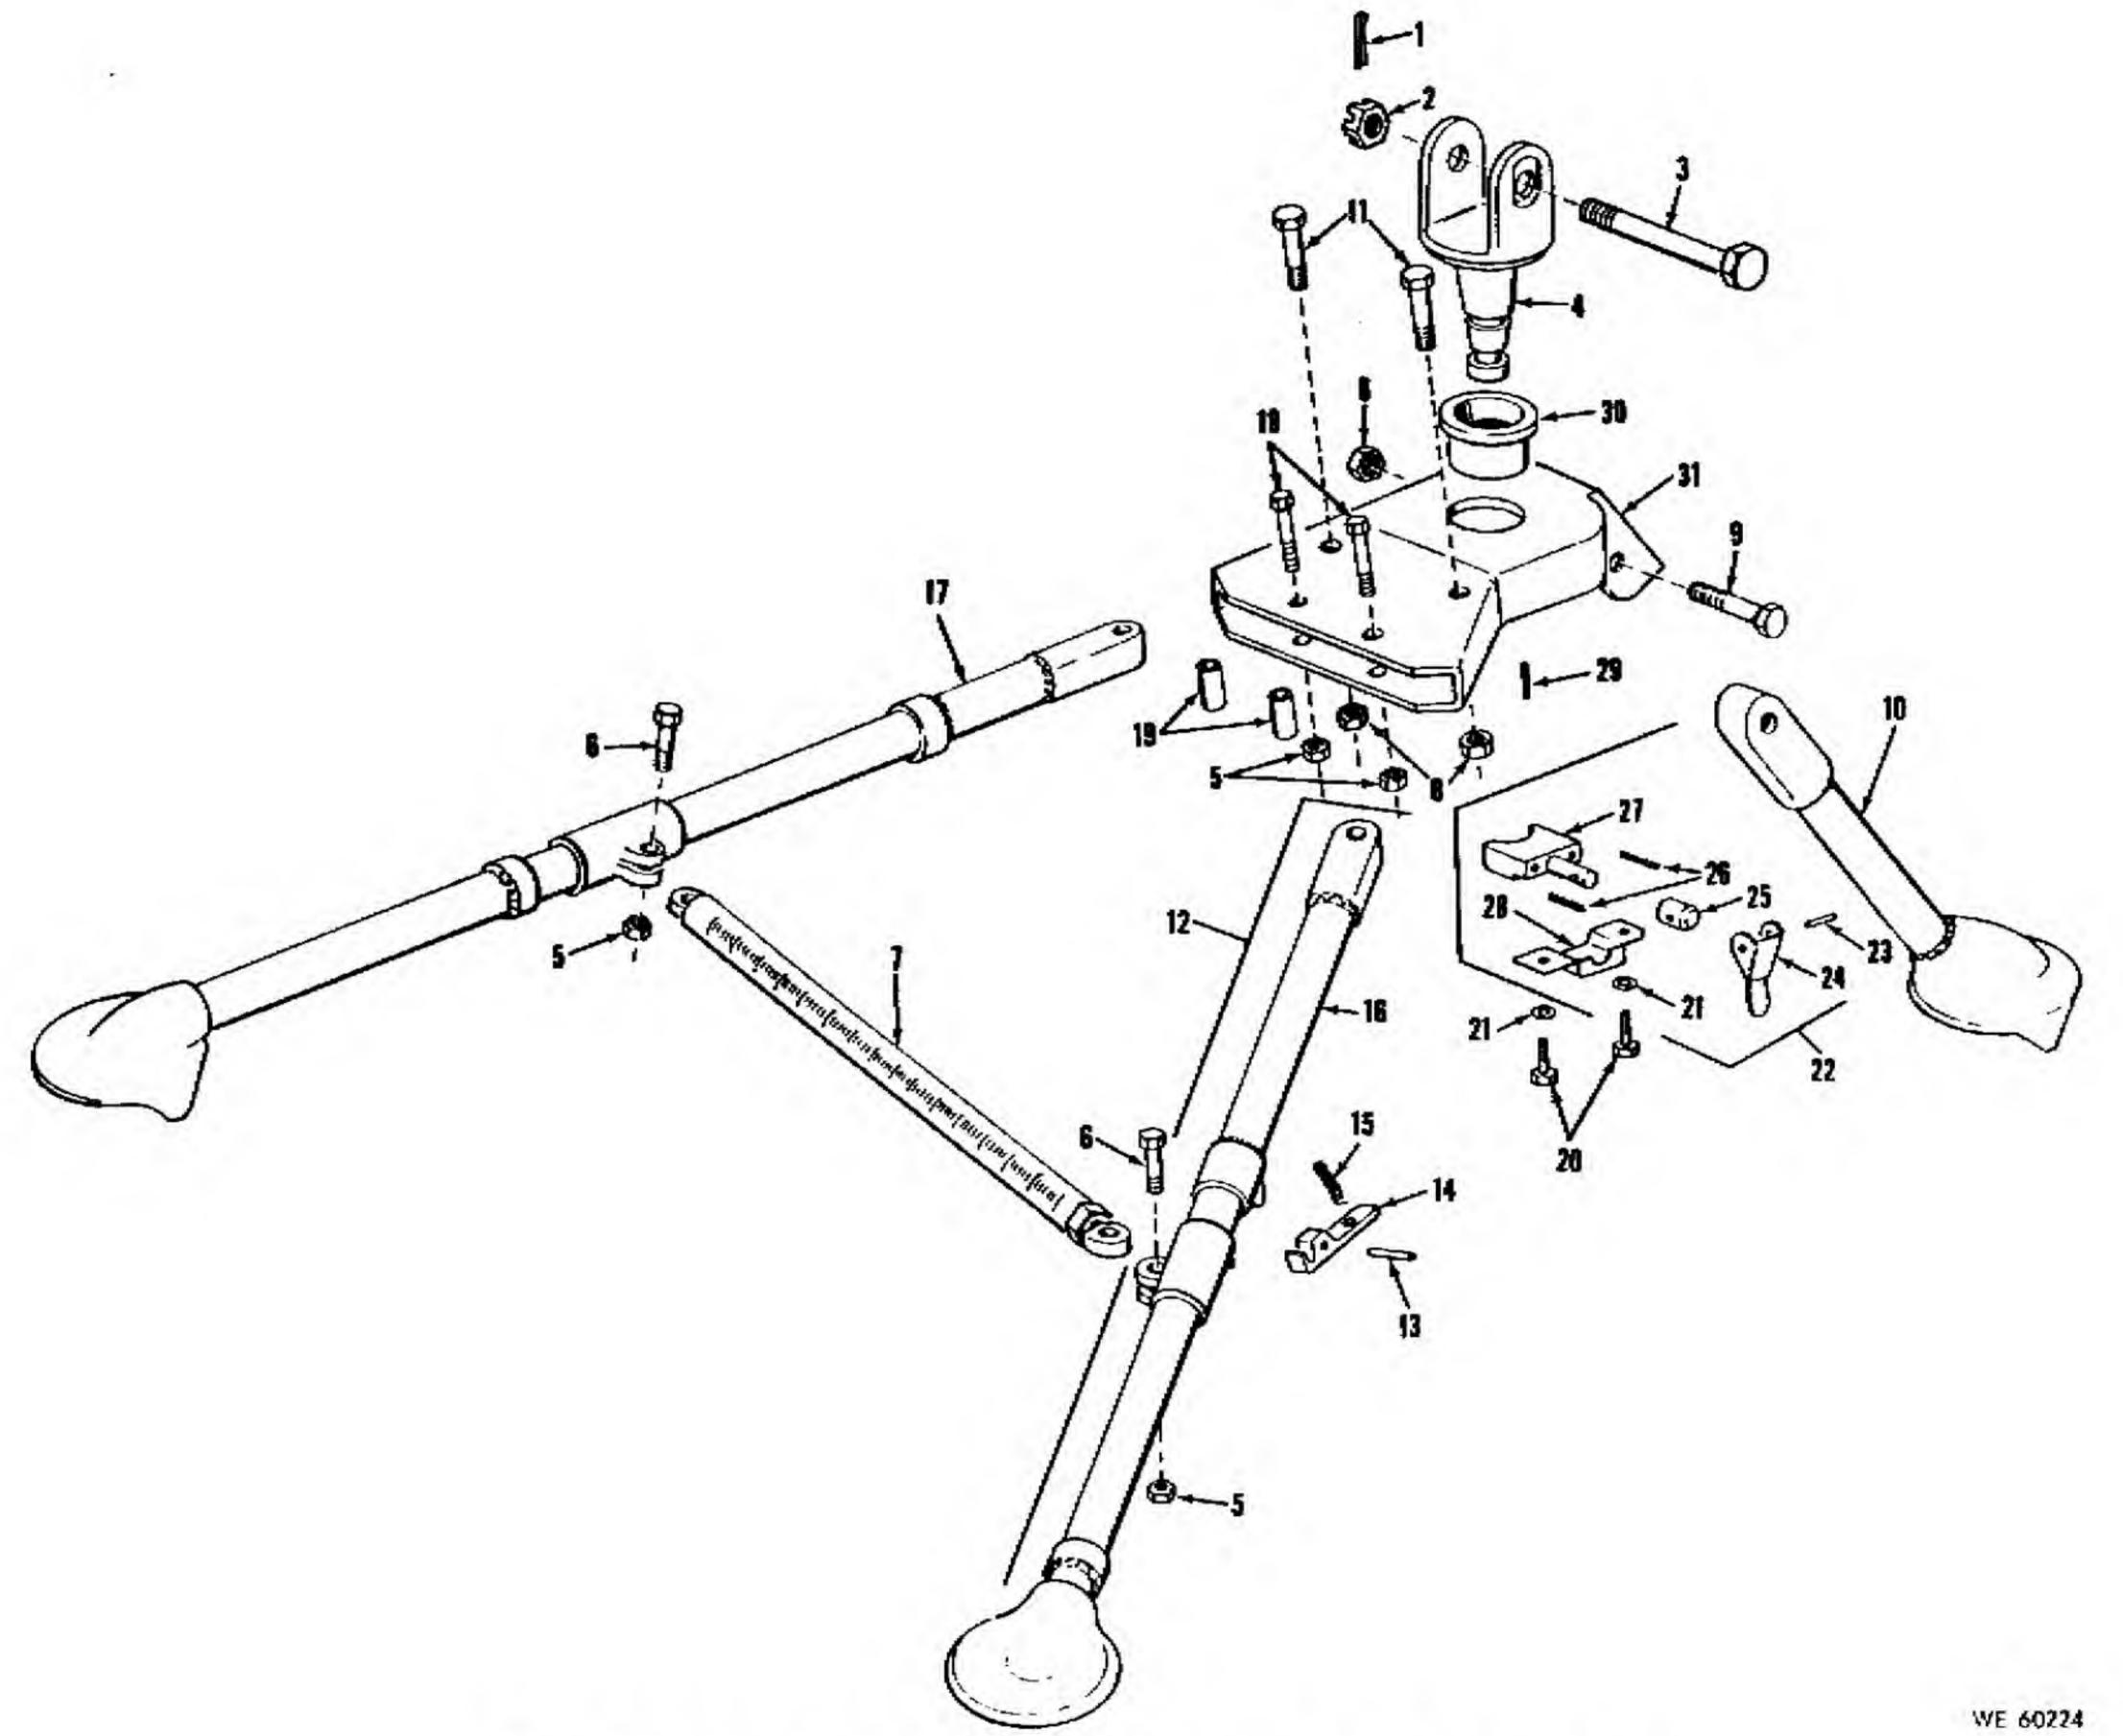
Head and leg group Machine Gun Tripod Mount, M2,—exploded view.
